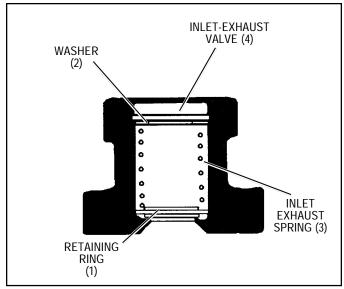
LQ-3<sup>™</sup> FRONT AXLE RATIO VALVE INNER PISTON ASSEMBLY
